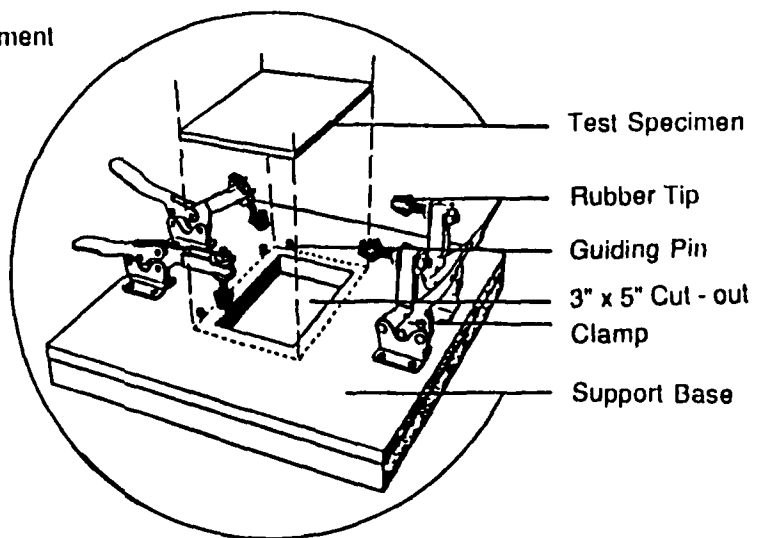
Schematic of the Specimen Support Fixture for Impact Testing
